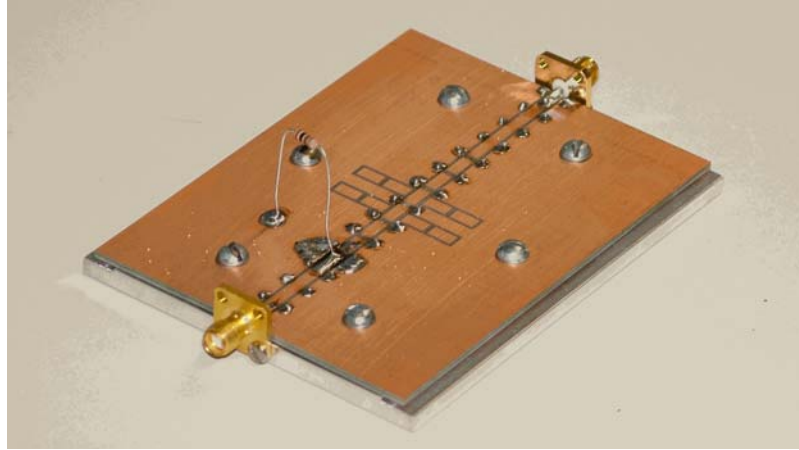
Soldering the resistor, with long leads, to the test fixture.
